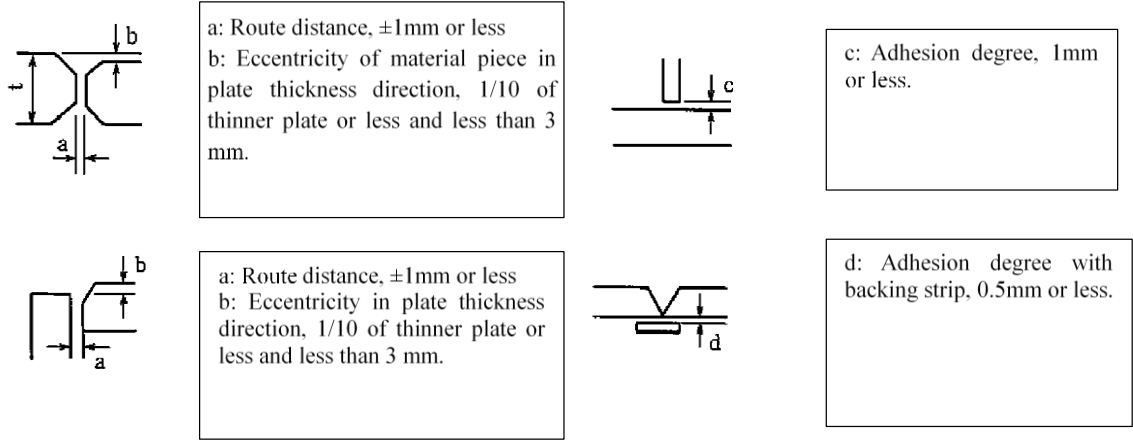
Assembly Tolerance of Material Piece
